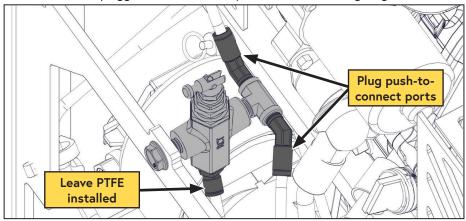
Plug unloader valve (engine base plate removed for clarity)
